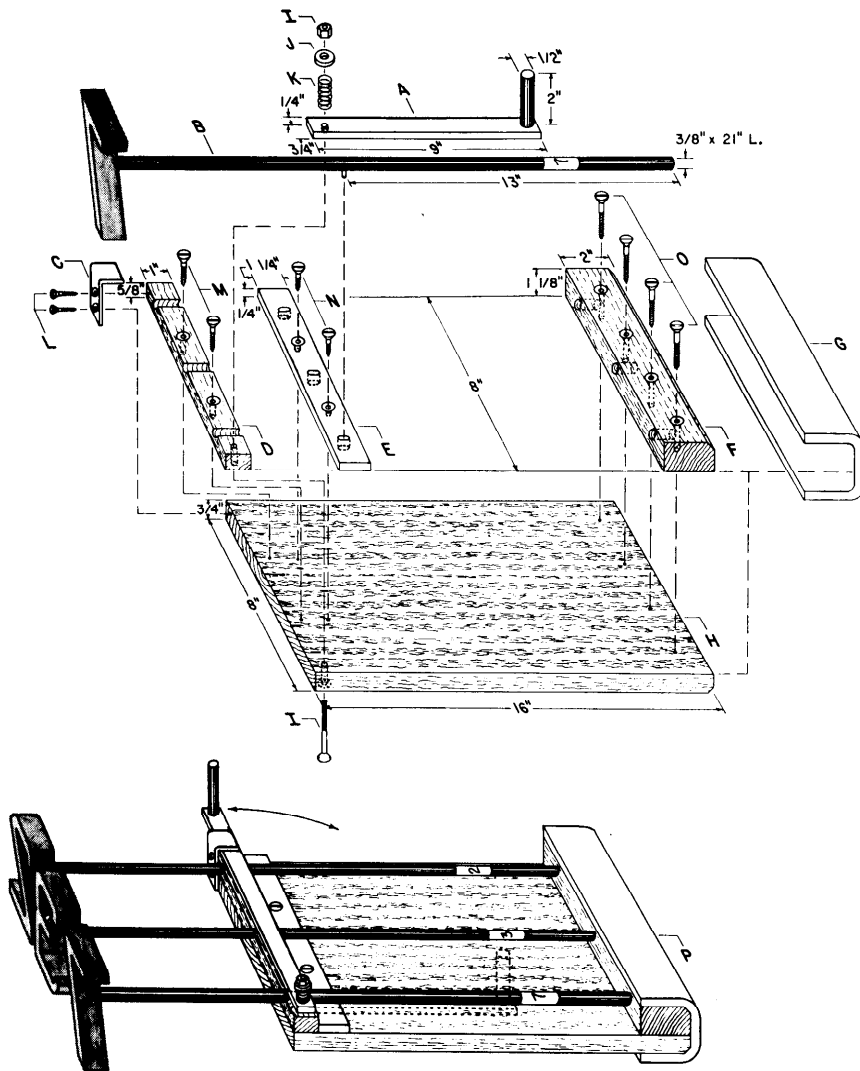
Exploded and assembled views of freeze-branding multiple iron holder: A. Locking Lever—Flat iron stock; $\frac{7}{32}$ " dia. hole centered $\frac{1}{2}$ " from left end; rod handle brazed $\frac{3}{8}$ " from right end. B. Branding Iron—Galvanized pipe with $2" \times 4"$ bronze numeral; $\frac{3}{16}$ " dia. steel pin inset, extended $\frac{1}{4}"$ and brazed. C. Locking Lever Latch— $2\frac{1}{2}" \times \frac{5}{8}" \times \frac{3}{8}"$ flat iron stock, 90° bend, $\frac{3}{4}"$ from upper end; $\frac{5}{32}"$ dia. countersunk screw holes centered $\frac{3}{8}"$ and $\frac{5}{8}"$ from lower end. D. Front Alignment Bracket—Oak Stock, $\frac{1}{16}"$ semi-cylindrical grooves at mid-point and $1"$ from each end (use $1" \times 1"$ stock; drill $\frac{1}{16}"$ dia. horizontal holes $\frac{1}{16}"$ from bottom; cut stock down from top to $\frac{5}{8}"$ thickness); $\frac{5}{32}"$ dia. hole centered $\frac{1}{2}"$ from lower end; $\frac{7}{32}"$ dia. countersunk vertical screw holes $3"$ from each end. E. Vertical Alignment Bar—Flat iron stock; $\frac{7}{32}" \times \frac{3}{8}"$ slotted holes on longitudinal centerline at mid-point and $1"$ from each end; $\frac{5}{32}"$ dia. countersunk vertical screw holes $3"$ from each end. F. Rear Alignment Bracket—Oak stock; $\frac{5}{32}"$ dia. $\times \frac{5}{8}"$ deep horizontal holes on longitudinal centerline at mid-point and $1"$ from each end; $\frac{7}{32}"$ dia. countersunk vertical screw holes $1"$, $3"$, $5"$, and $7"$ from lower end; $\frac{3}{8}" \times 45^\circ$ bevel on upper right edge. G. Padding— $8" \times 6" \times \frac{3}{8}"$ to $\frac{1}{2}"$ foam rubber, held in place with contact cement. H. Base—Oak stock; $\frac{5}{32}"$ dia. hole (countersunk on lower side) $\frac{1}{2}"$ from left end and lower side; $\frac{3}{8}" \times 45^\circ$ bevel on lower right edge. Drill pilot holes for all screws. I. $1-\frac{3}{16}" \times 2\frac{1}{4}"$ flat head slotted stove bolt with nut. J. $1-\frac{3}{4}"$ flat washer. K. $1-\frac{1}{4}" \times \frac{3}{4}"$ I. D. heavy duty compression spring. L. $2-\text{No. } 7 \times 1"$ flat head slotted wood screws. M. $2-\text{No. } 12 \times 1\frac{1}{4}"$ flat head slotted wood screws. N. $2-\text{No. } 12 \times 1"$ flat head slotted wood screws. O. $4-\text{No. } 12 \times 1\frac{1}{4}"$ flat head slotted wood screws. P. Complete Assembly.
